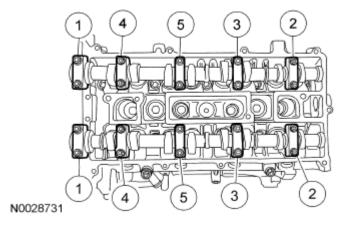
Identifying Camshaft Bearing Cap Bolts Loosen Sequence Courtesy of FORD MOTOR CO.
